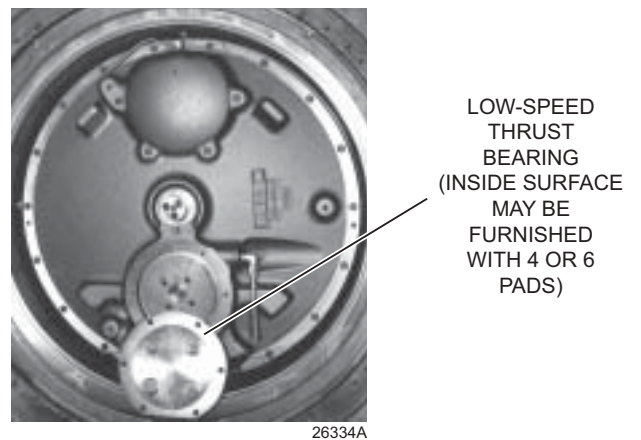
LOW-SPEED THRUST BEARING REMOVED
